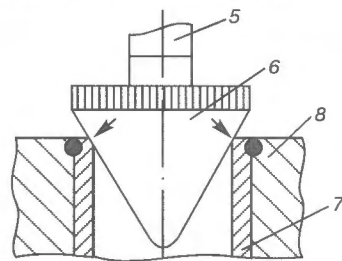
Schematic of the effect exerted by the extension piece on the circumferential weld
